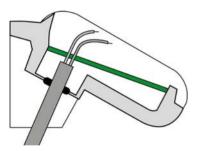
Remove the cable shielding under the circuit board and only feed the connector cables upwards through the openings in the circuit board.
